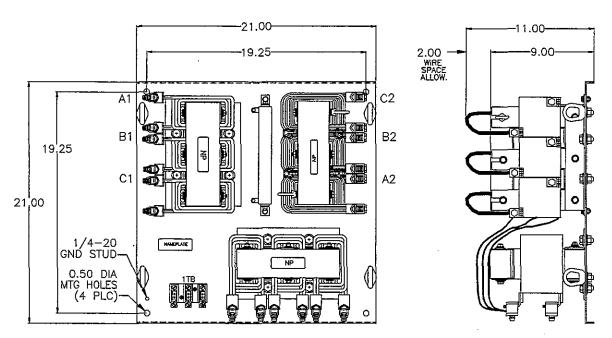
125 - 150 HP, 480 VAC Outline Drawing
